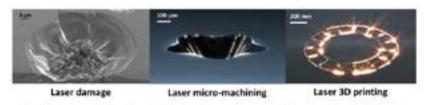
Examples of laser damage (left), laser micro-machining (center) and laser-based 3D printing.
